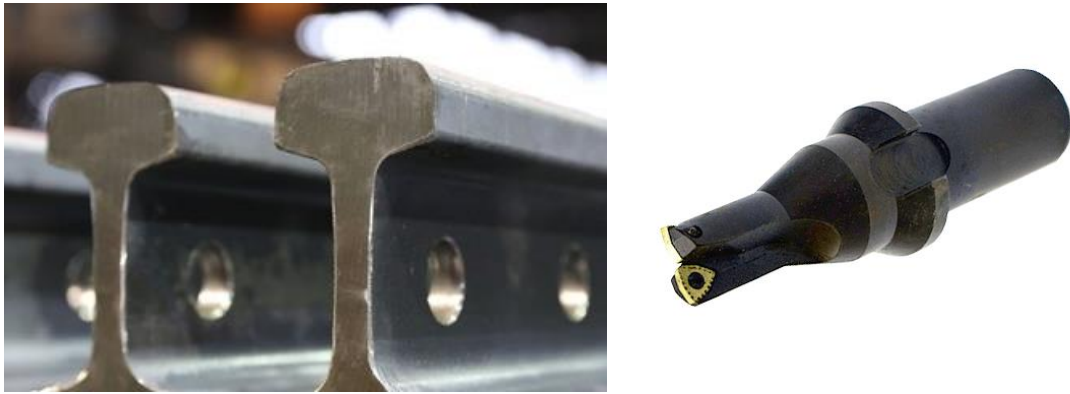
Rail drills with mechanical fastening of replaceable carbide inserts
